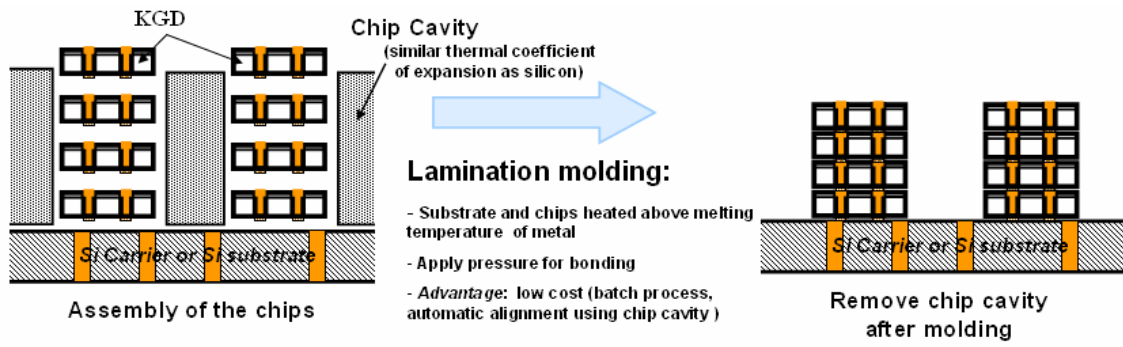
Chip-to-Wafer bonding technique using the chip cavity method.
